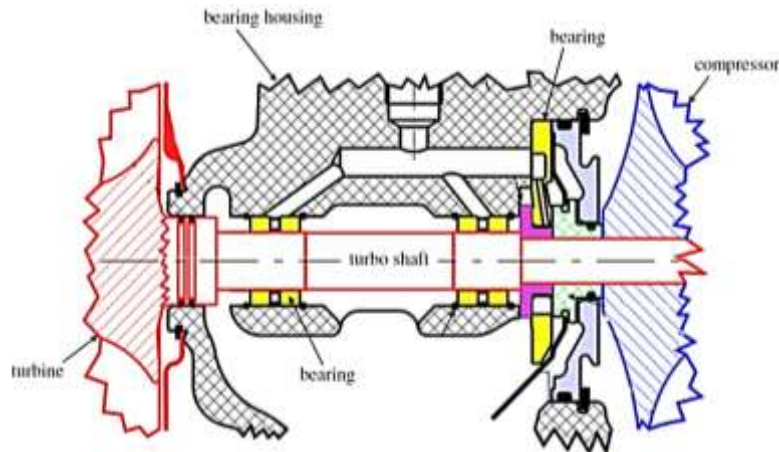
Cross-sectional view of the shaft and bearing system ^[1]
